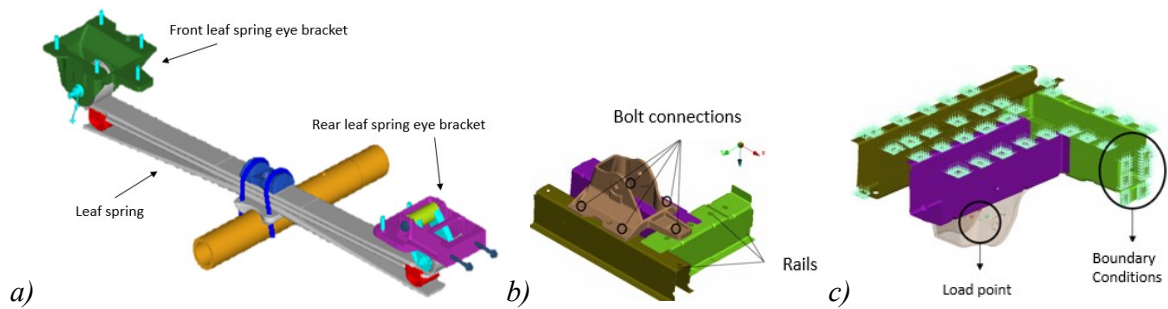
a) Leaf spring assembly, b) Rear view of body attachment, c) Load points and boundary conditions
